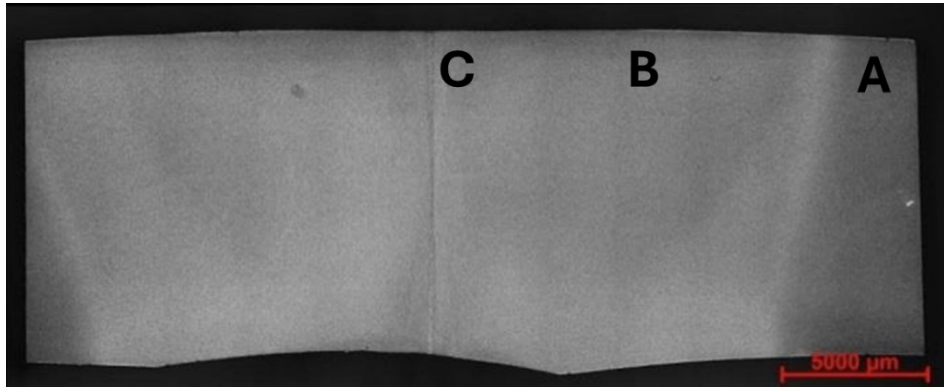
Zones of PWHT HFI welded pipe weld [121].
